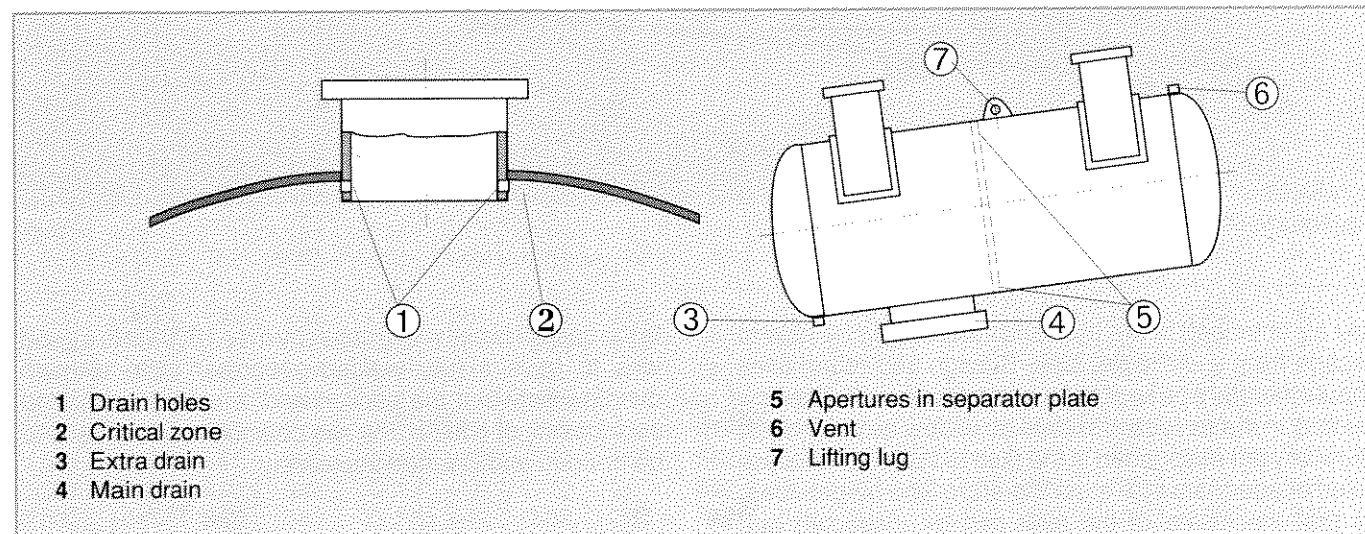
Additional features for galvanizing a cylindrical fluid tank in a bath
